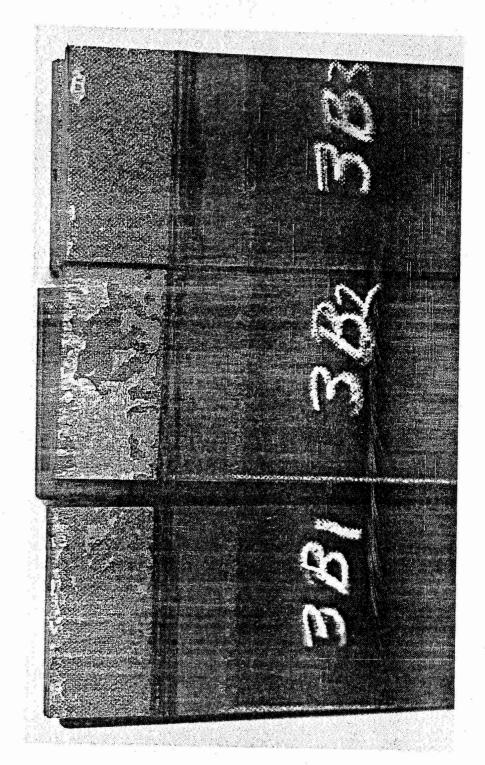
Lap Shear Specimen Failures on Vapor Honed Silicone Rubber Surfaces.
